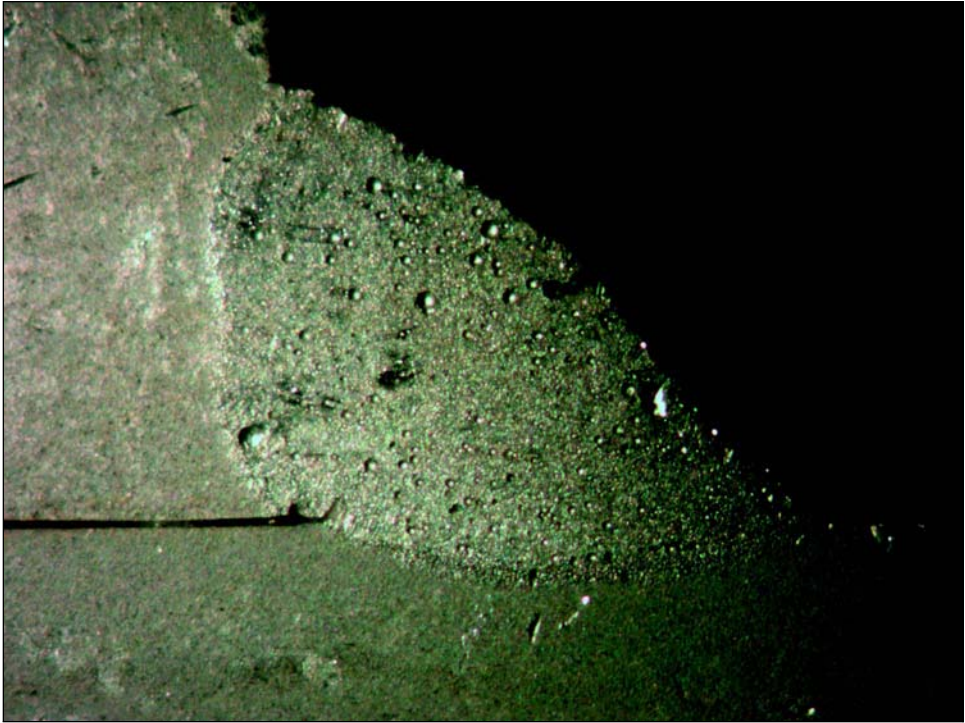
Porosity is Seen Here in a Cross Section of a Fillet Weld in Aluminum
